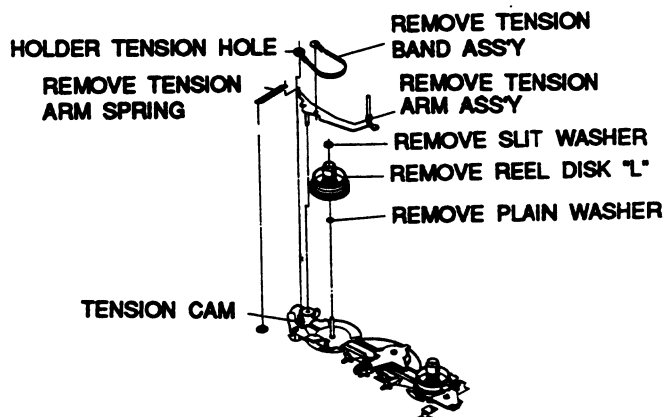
Reel Disk "L" Tension Band & Tension Arm Removal
